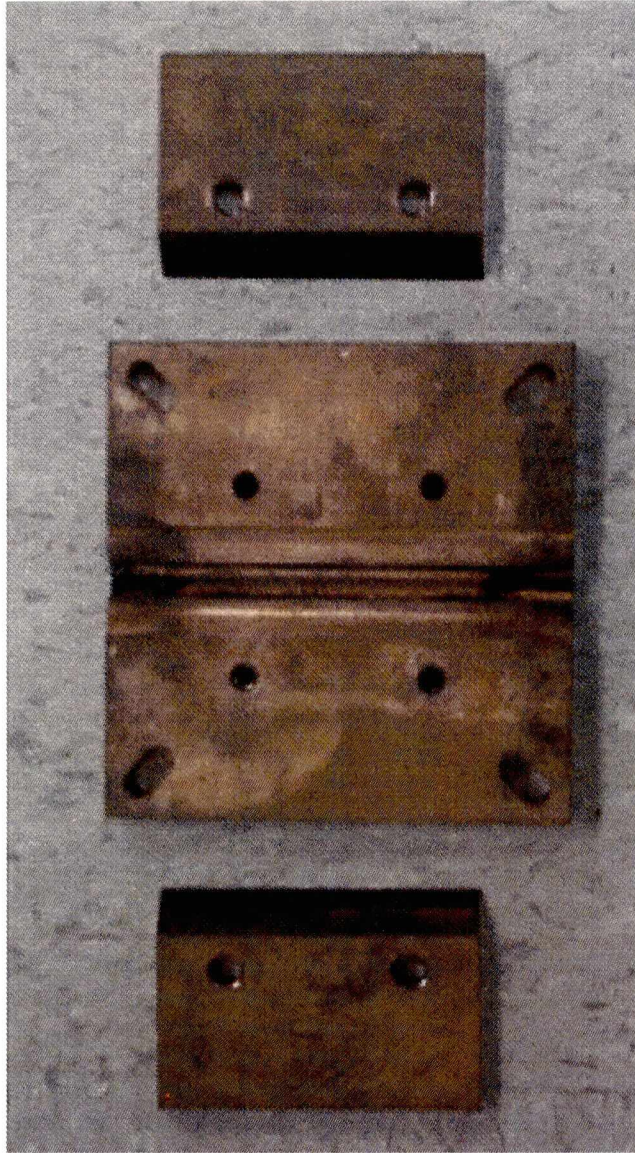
Welding Fixture. This copper welding fixture was used to clamp the metal samples for the study. It is shown here with the clamps removed so that the base plate may be viewed fully.
